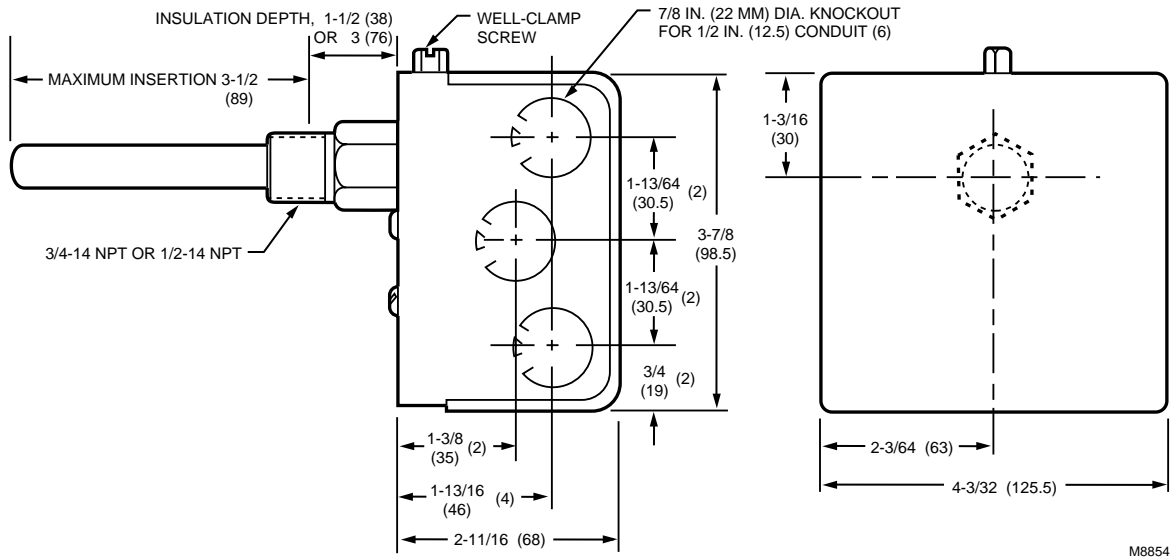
L4081A,B and L6081A mounting dimensions in in. (mm).
